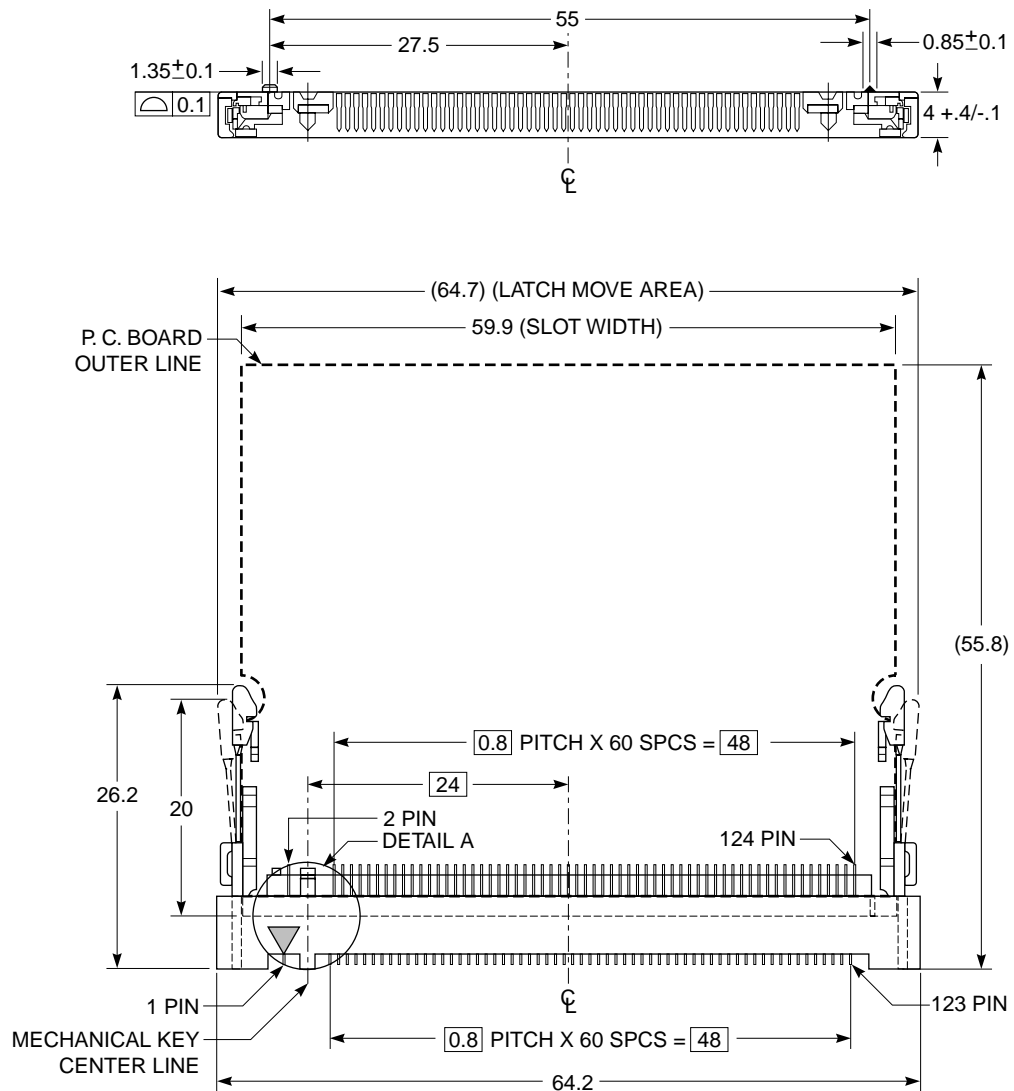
Type III System Connector (Shown with Type IIIA Card Inserted)
